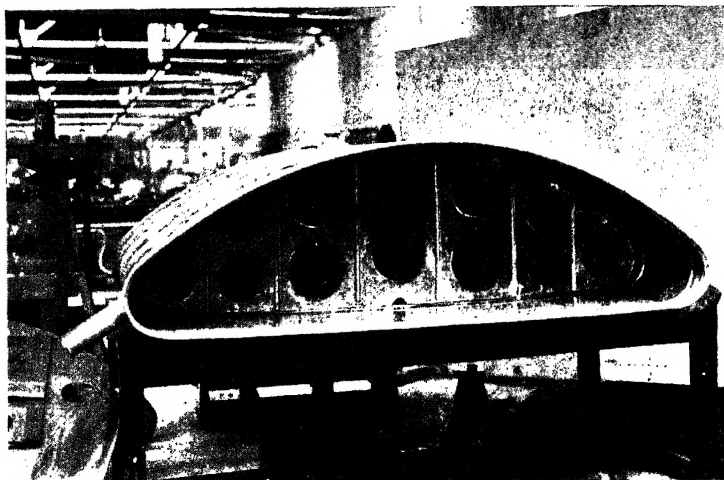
SHOWING AN ASSEMBLED BAFFLE.
